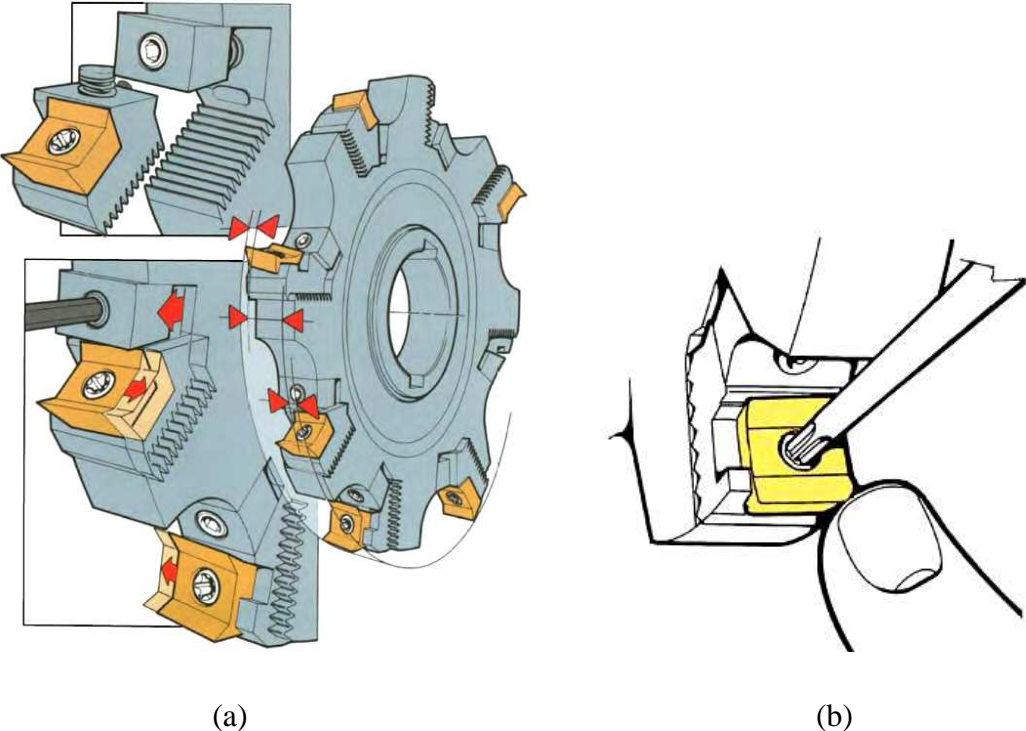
The correct mounting and setting of a cutting inserts in a staggered-toothed side-and-face cutter body:
